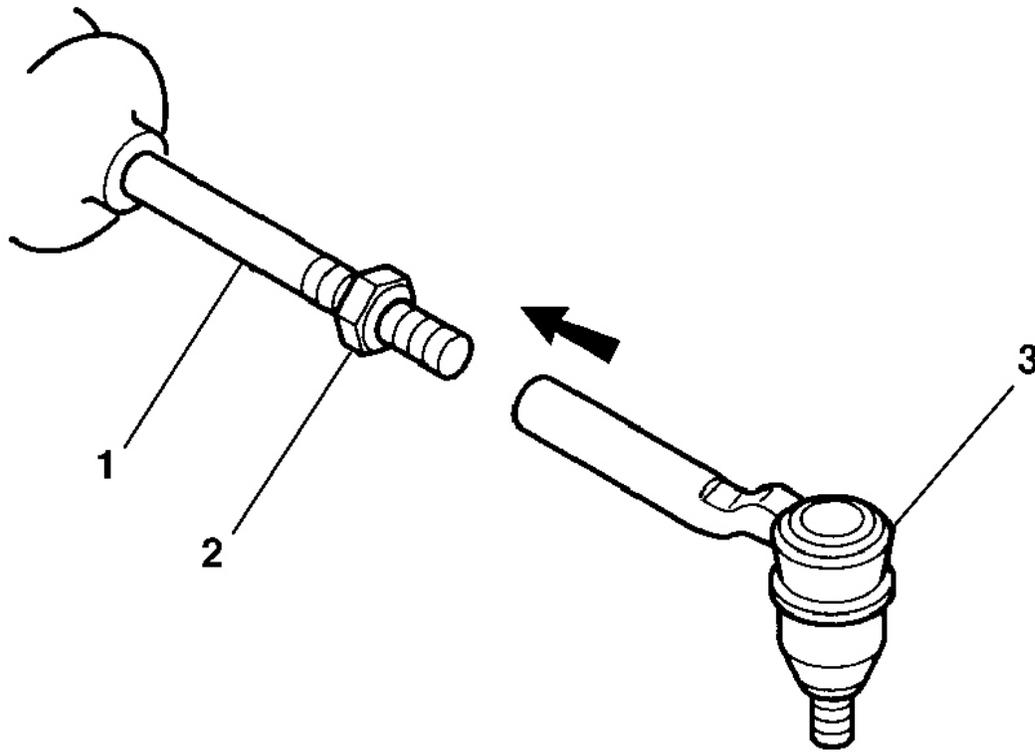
Installing Outer Tie Rod Assembly To Inner Tie Rod Assembly
